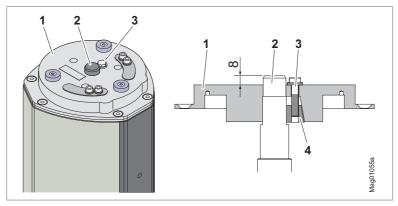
Checking the drive shaft dimension and mounting the outer tube
